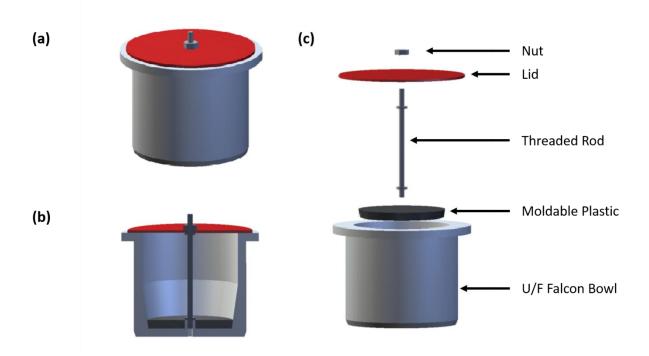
(a) front view, (b) cross-sectional view and (c) exploded view of the modified Falcon U/F bowl
